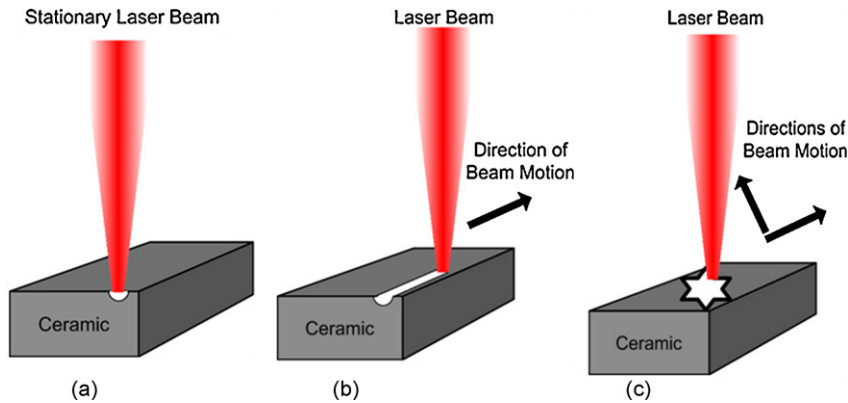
Schematic of basic laser machining processes (a) laser drilling (one-dimensional machining), (b) laser cutting (two-dimensional machining), (c) engraving a star by laser beam (three-dimensional machining).
